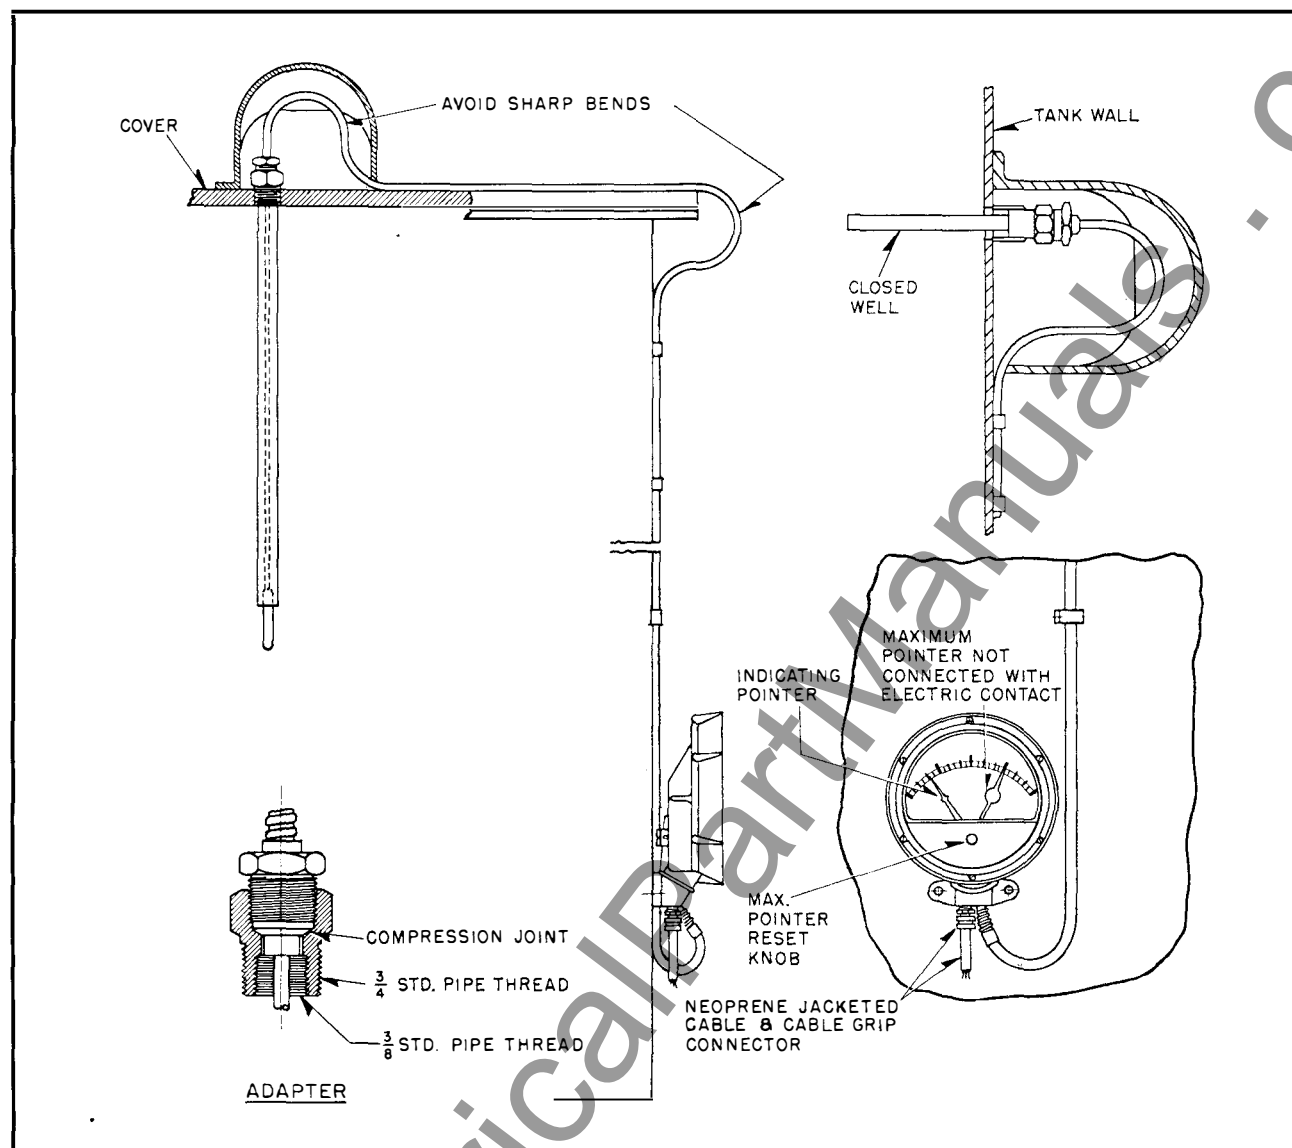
Sectional View of Transformer Showing Mounting of Thermometer with Flexible Tube and Alarm Contacts.
